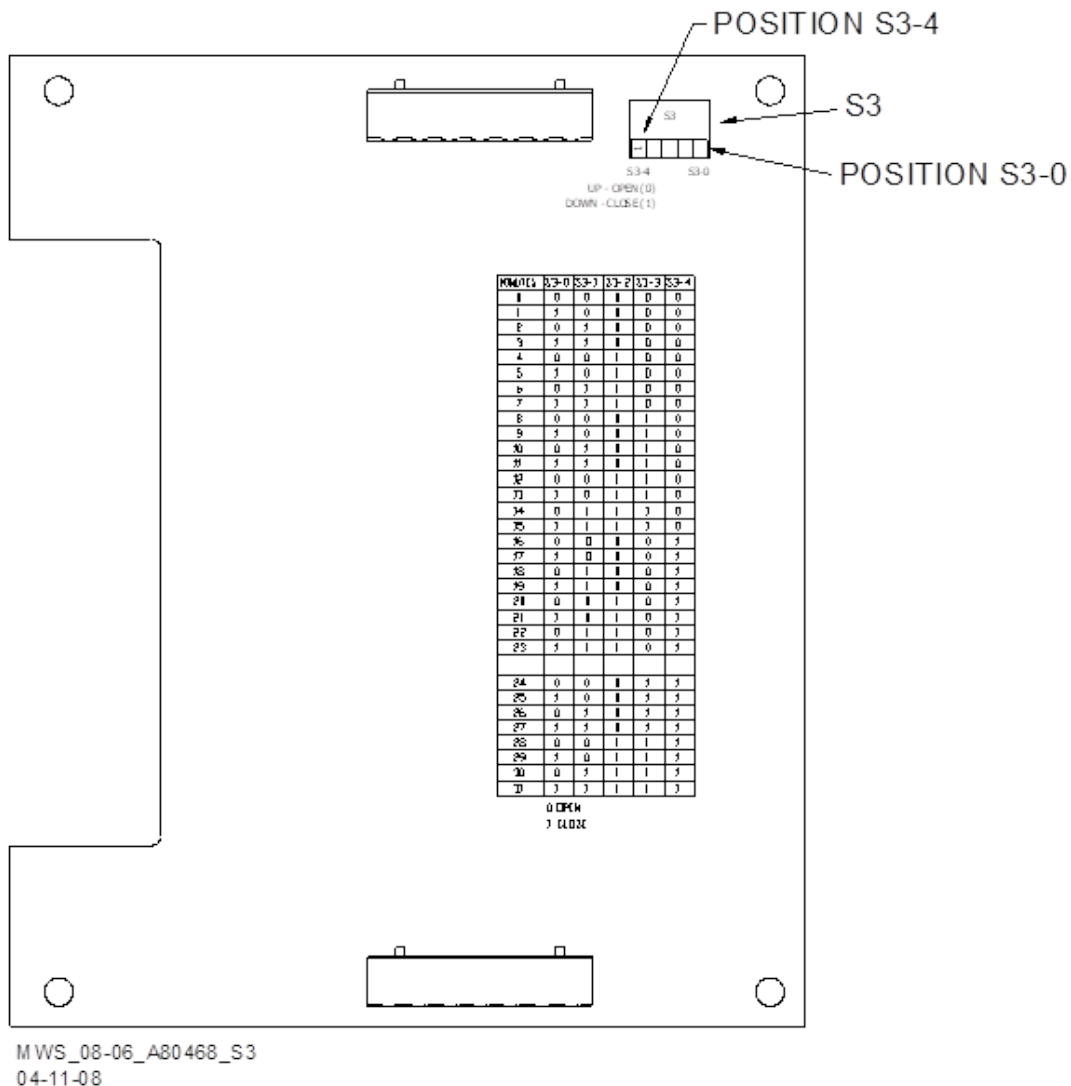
Transfer Module Assembly, A80468, S3 Switch Position
